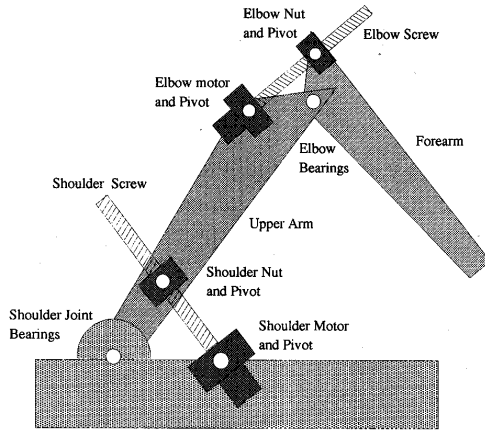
Shoulder and elbow joints of the FMR. These joints are driven by roller screws through closed kinematic chains.
